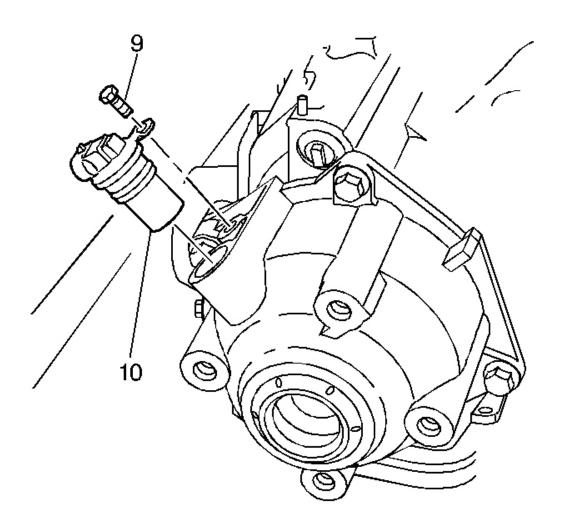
Identifying Vehicle Speed Sensor (VSS) Courtesy of GENERAL MOTORS CORP.
